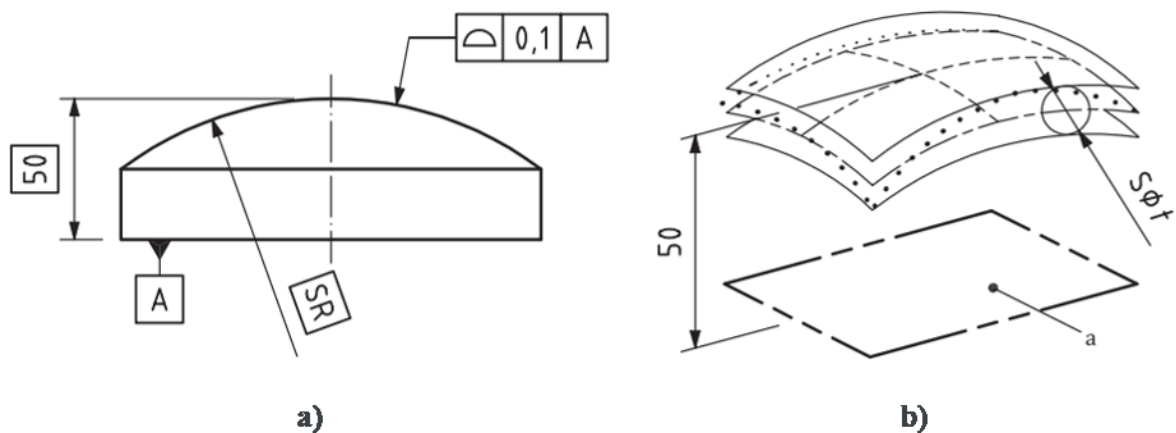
Surface profile tolerance definition. A) drawing indication, b) interpretation. [16]
